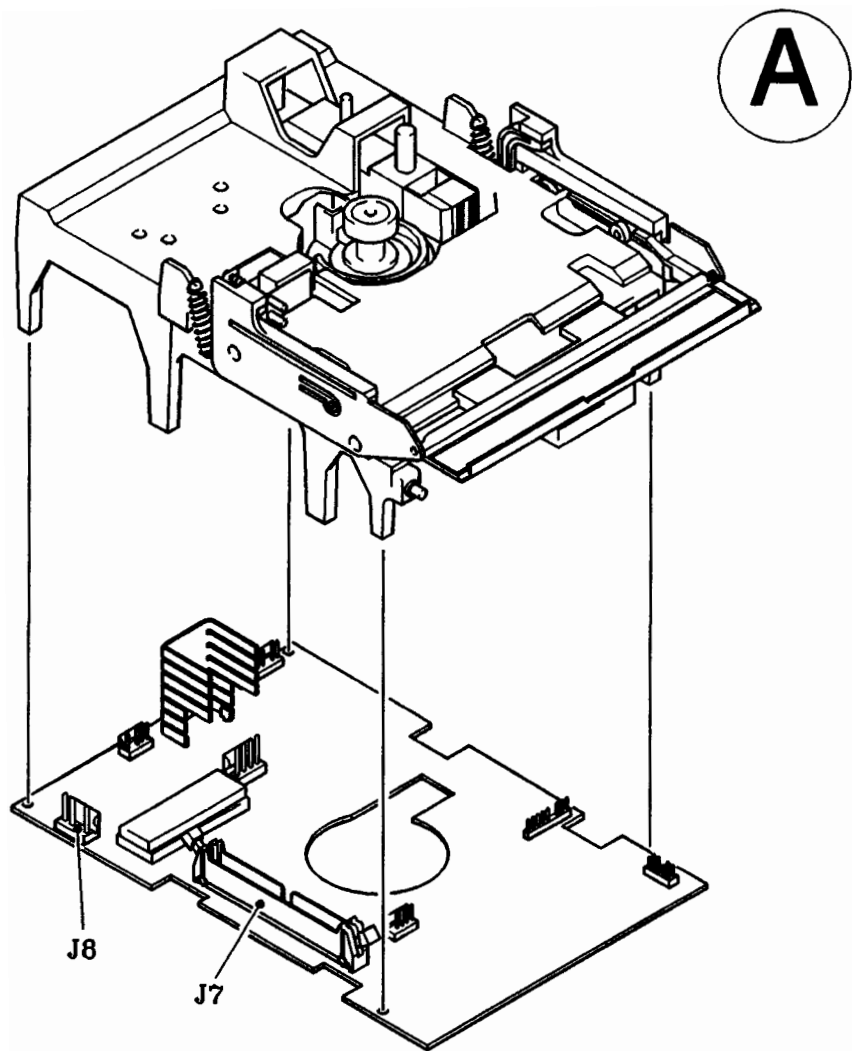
HP 9144A Exploded View (sheet 2 of 2)
